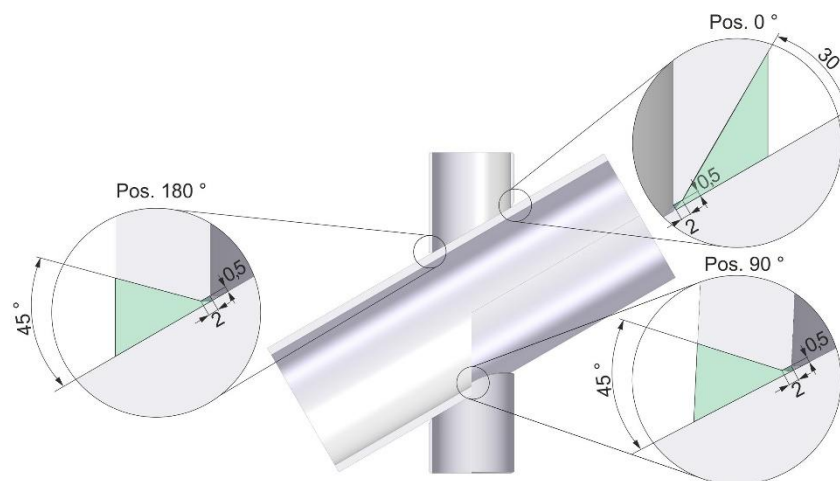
Weld seam preparation for the automated welding of the tubular X-joints according to [4]
